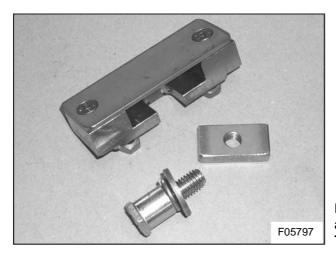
Parts VH 10759356 base plate assembly, VH 10753209 striker bolt nut, and TriMark striker bolt and washer
